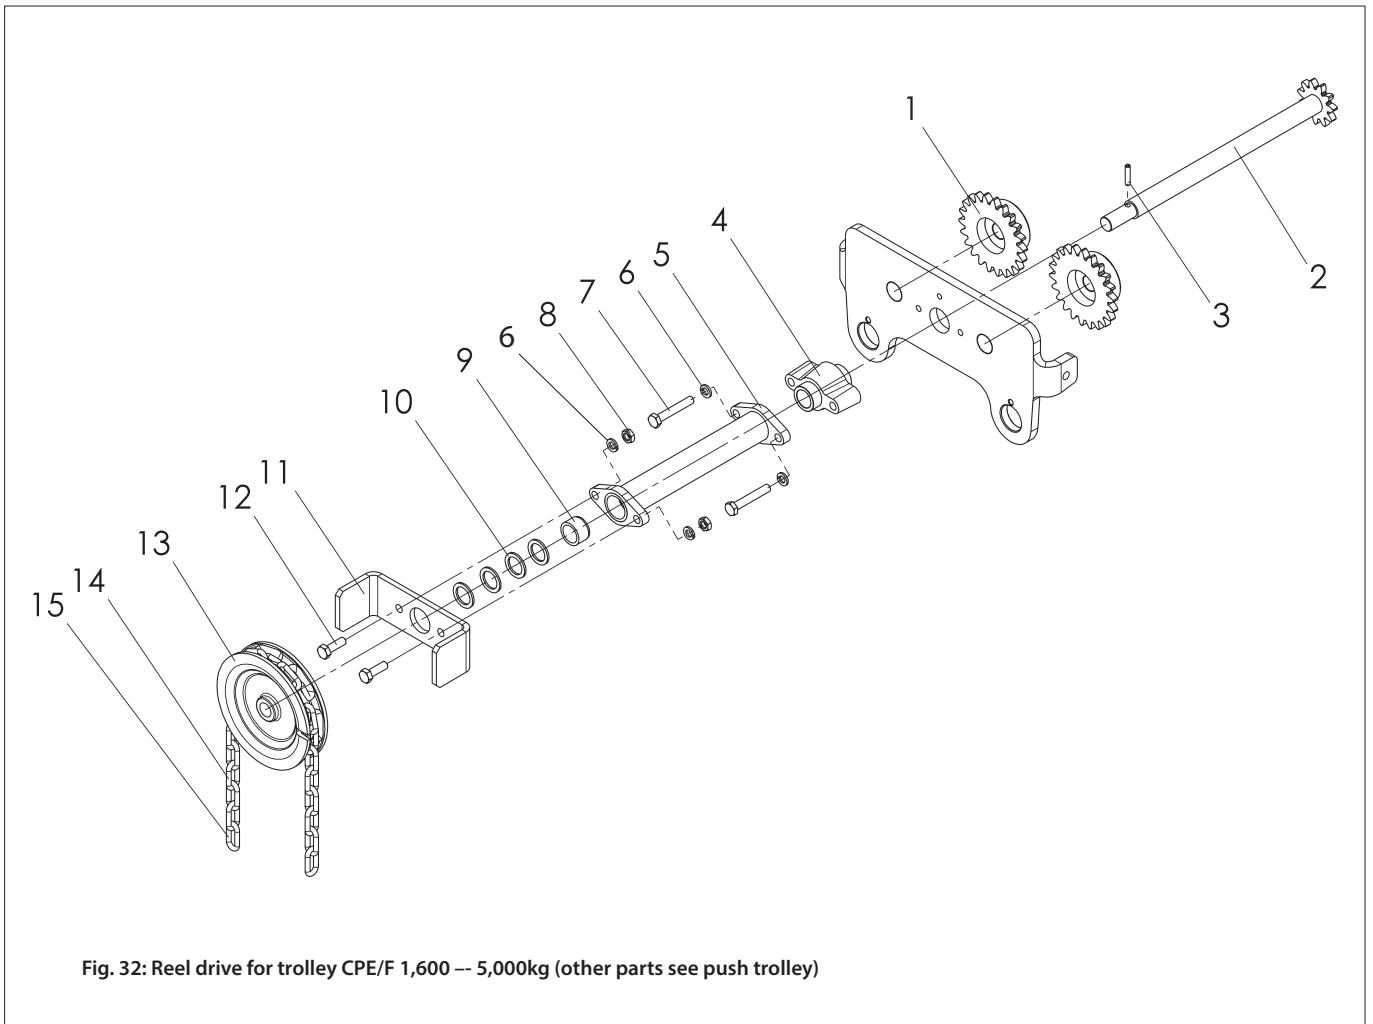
Reel drive for trolley CPE/F 1,600 -- 5,000kg (other parts see push trolley)
